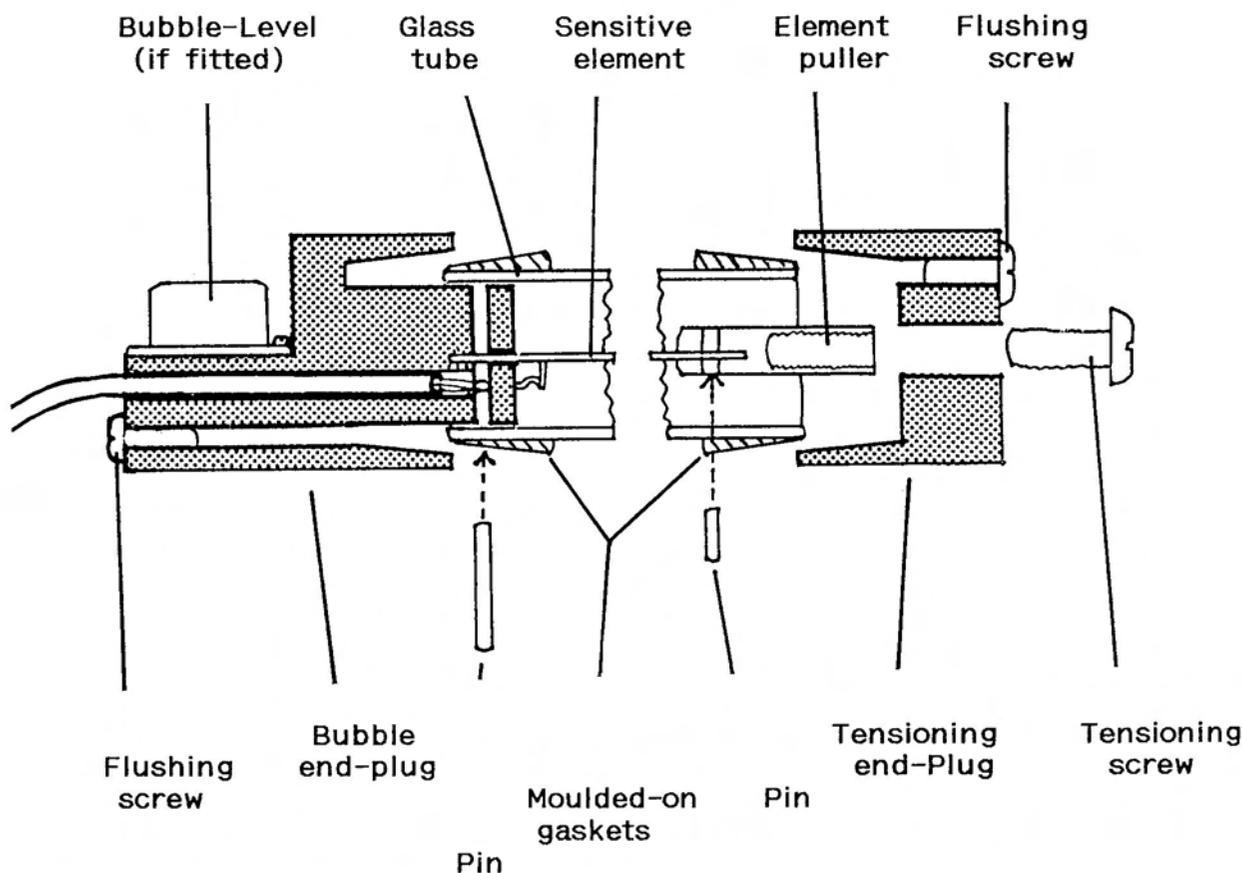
Section through a Large Tube Solarimeter (diagrammatic)
